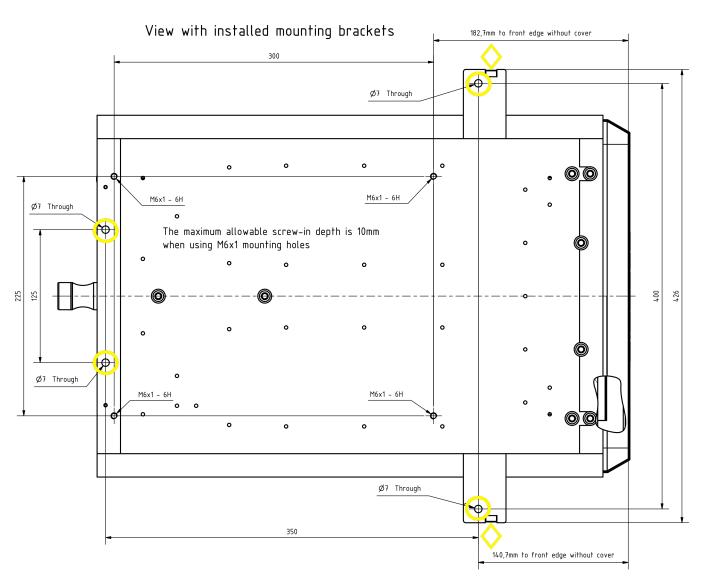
Drawing of the EIGER2 X 9M-V Detector Base Plate with Mounting Brackets (bottom view)
